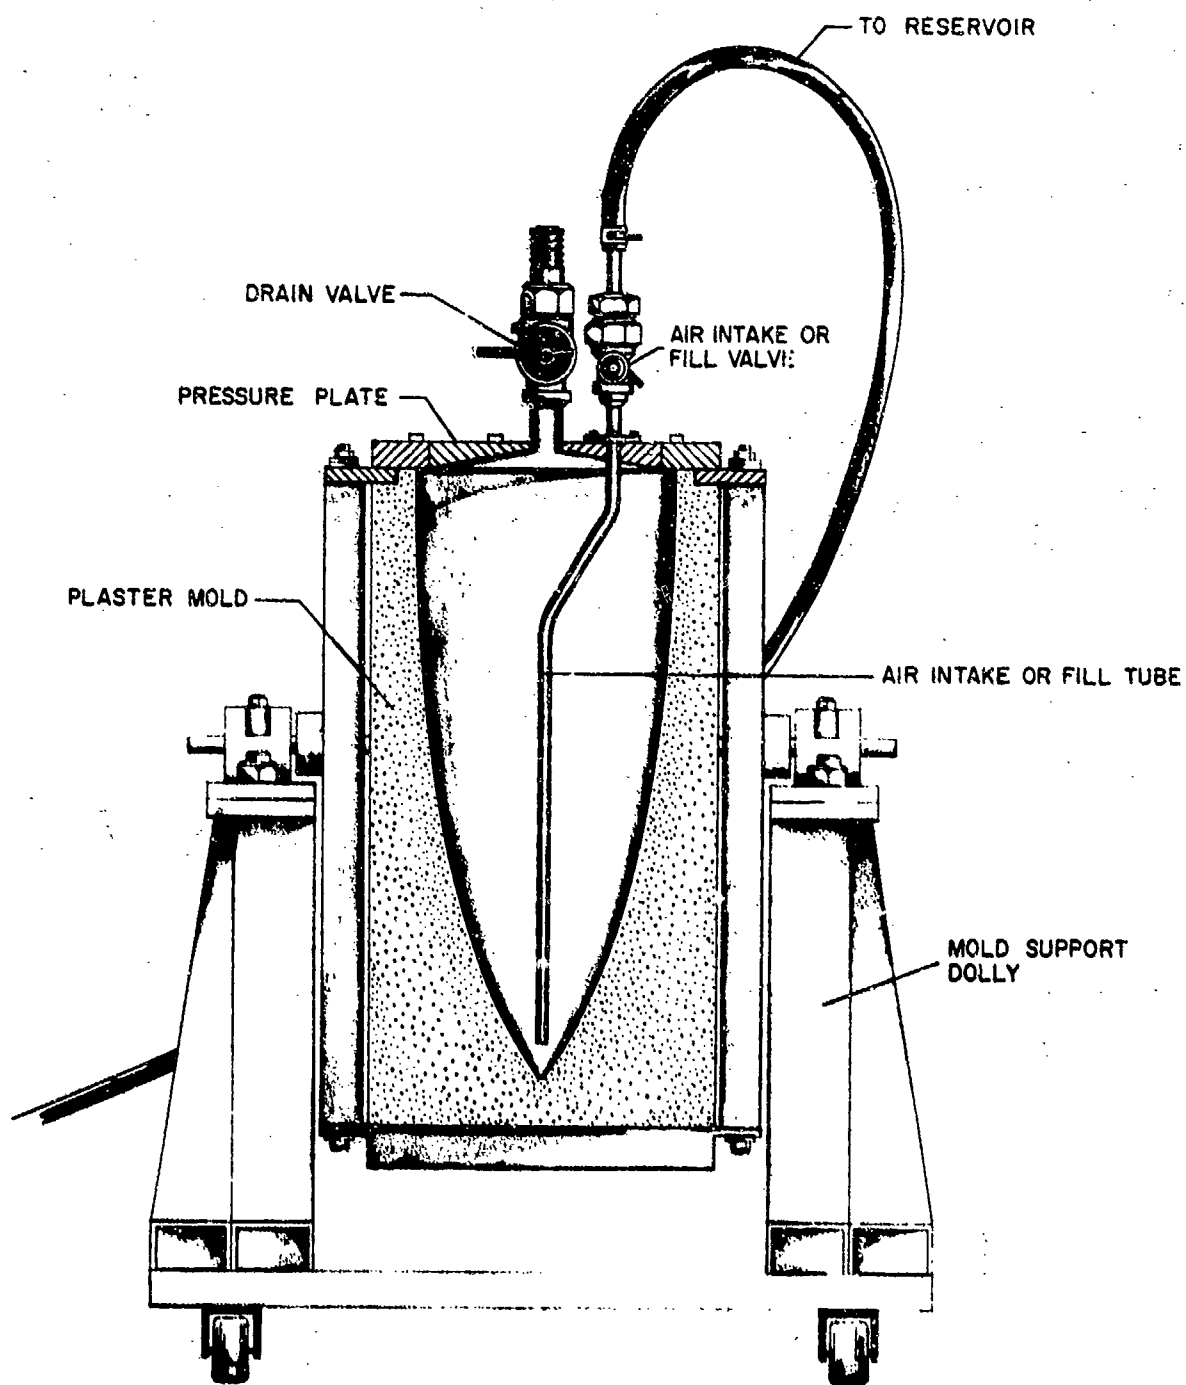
Typical Pressure Casting Setup for Slip Casting Fused Silica Radome.
